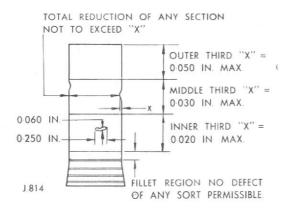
Division of turbine blade for inspection and repair purposes, indicating maximum limits of repair.
